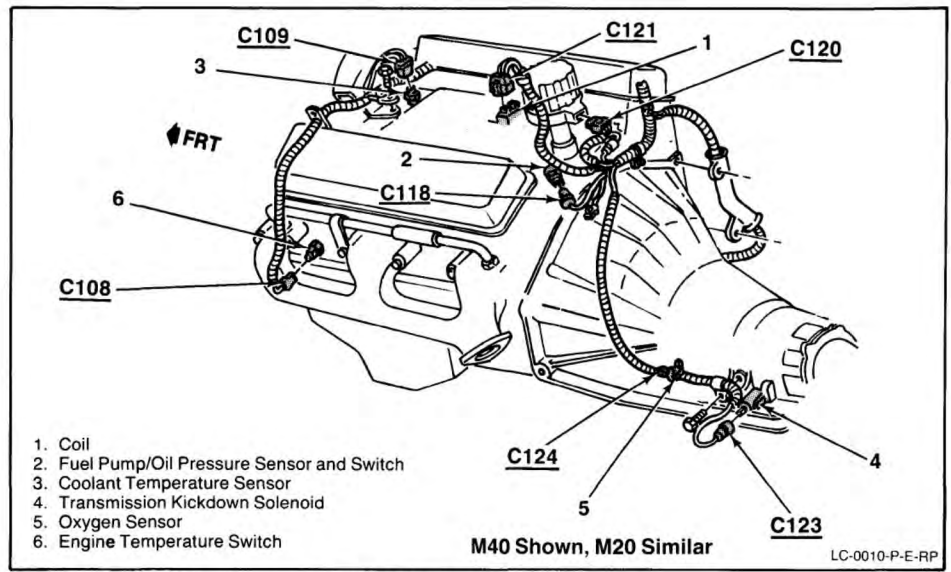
Engine Wiring Harness, LH Side (RPO L05 w/P42)
